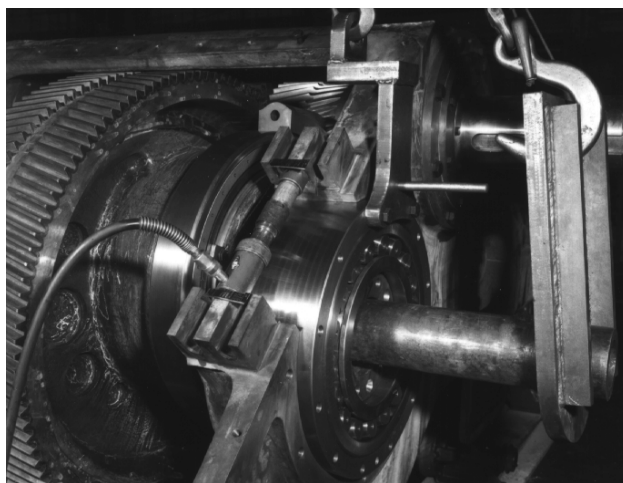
ECCENTRIC GEAR ASSEMBLY SUPPORT
